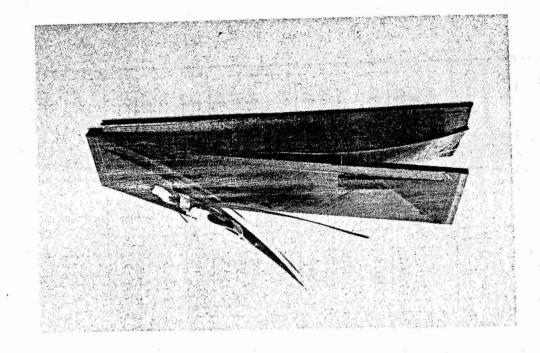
Compression Failure Of Specimen 2-5-13Bl Tested in the 2-Inch Wide V-Groove Fixture.
